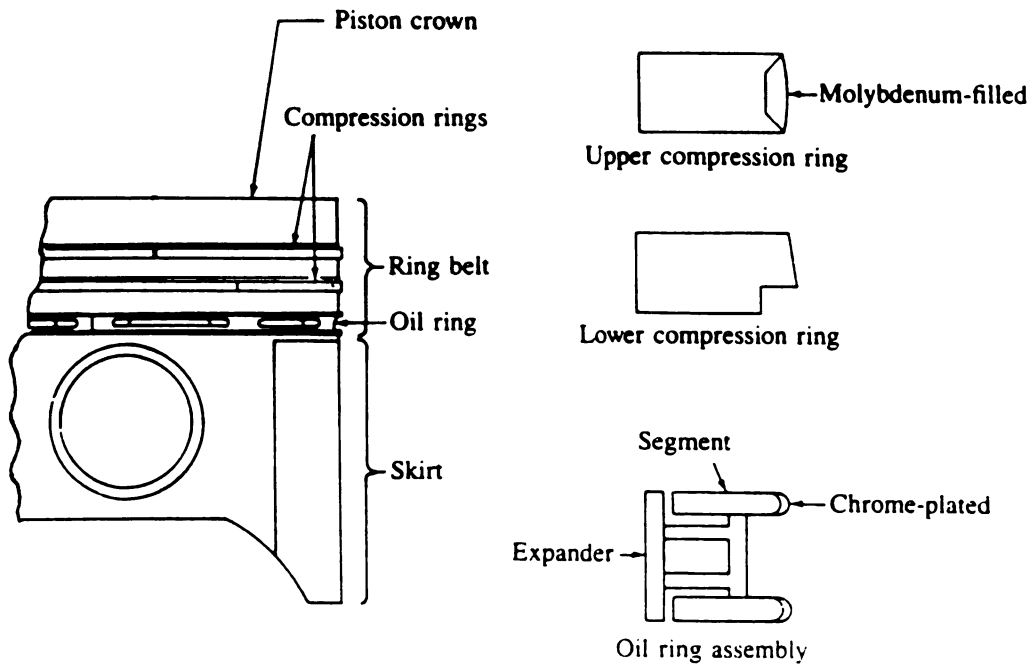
Schematic of piston and ring assembly in a piston engine [2]
